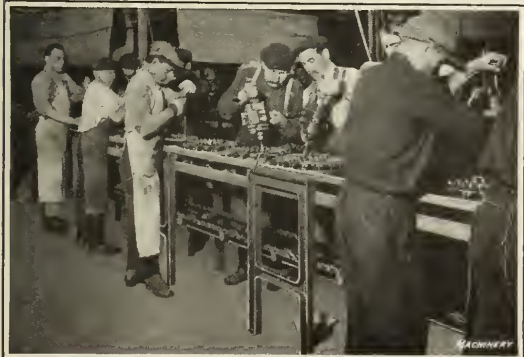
In this case the magnetic generator unit of the motor is carried on an endless belt conveyor, and men with power-driven wrenches are screwing up the nuts. Attention is called to the large number of men at work; this is typical of the intensive production methods in the Ford Motor Co.'s shops
